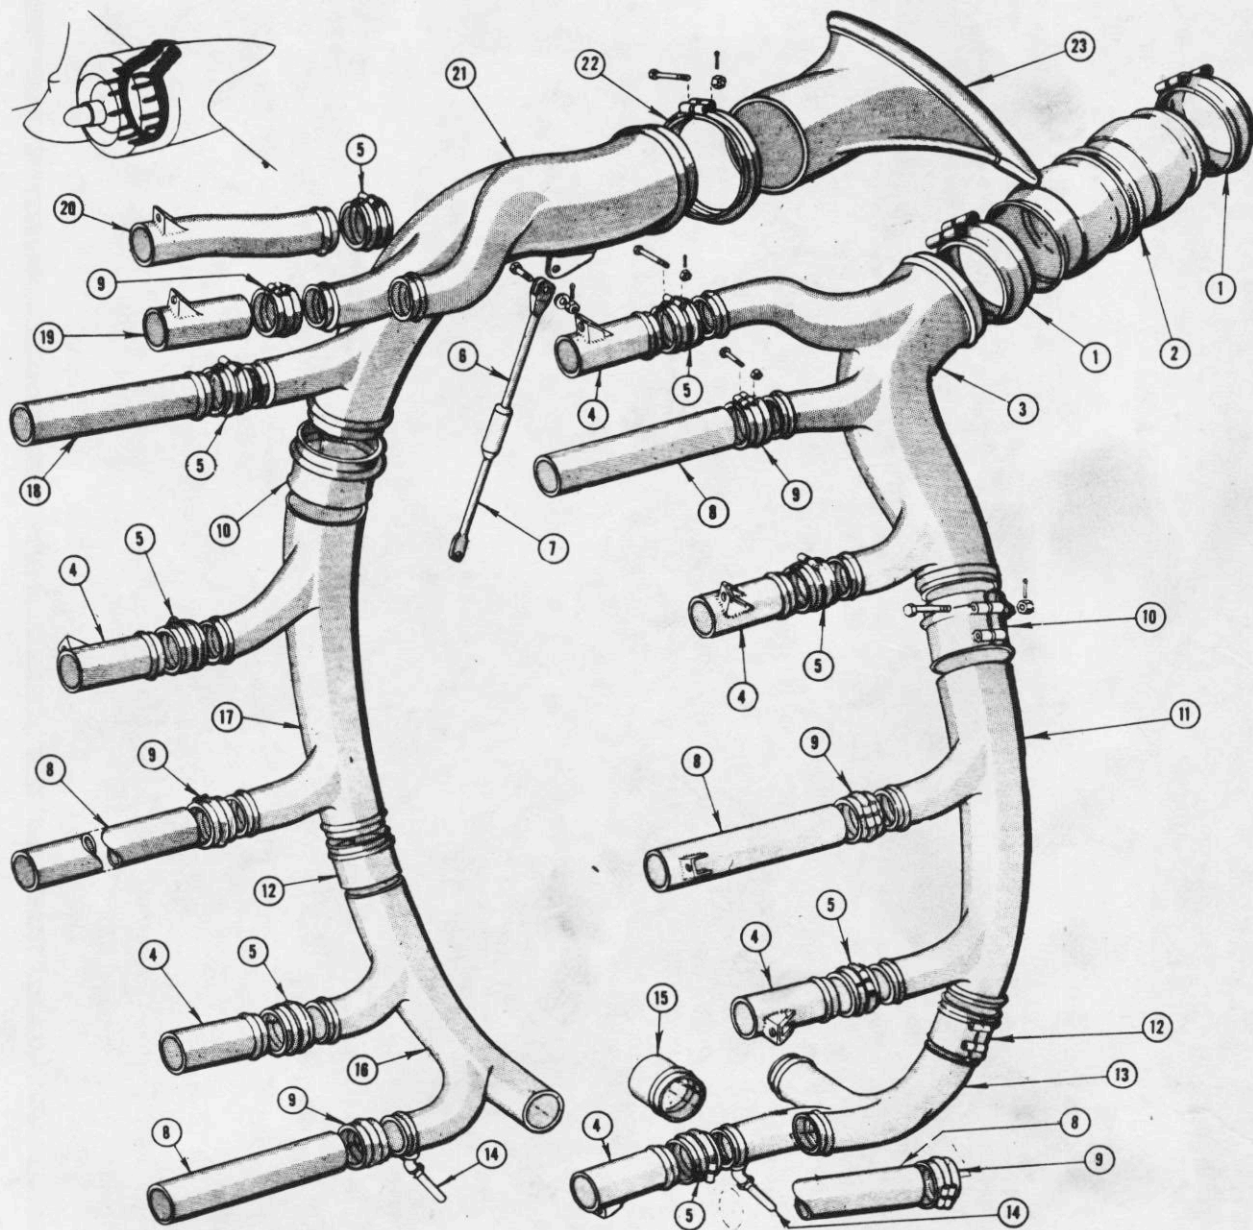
Quick Engine Change Unit—Exhaust Collector Ring
